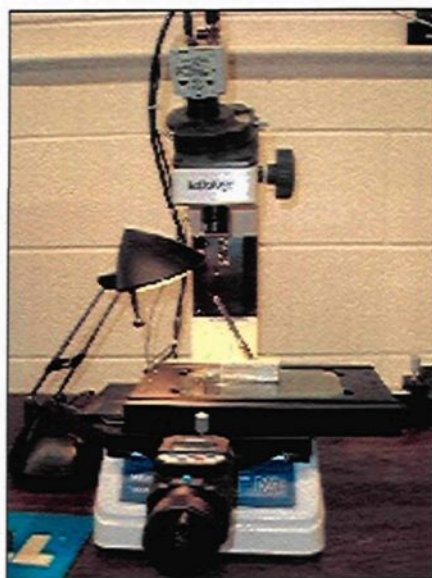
TM-505 Type Toolmaker's Microscope.
